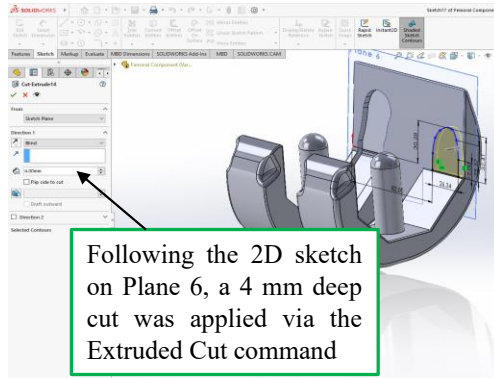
Creating a 2D sketch on Plane 6, defined on the selected surface of the Femoral Component, and performing a cut using the Extruded Cut command
